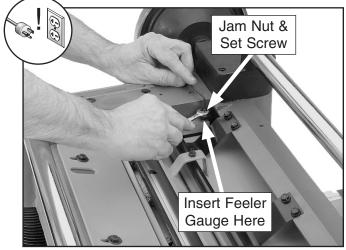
Feeler gauge location for adjusting pressure bar height when using wood blocks.
